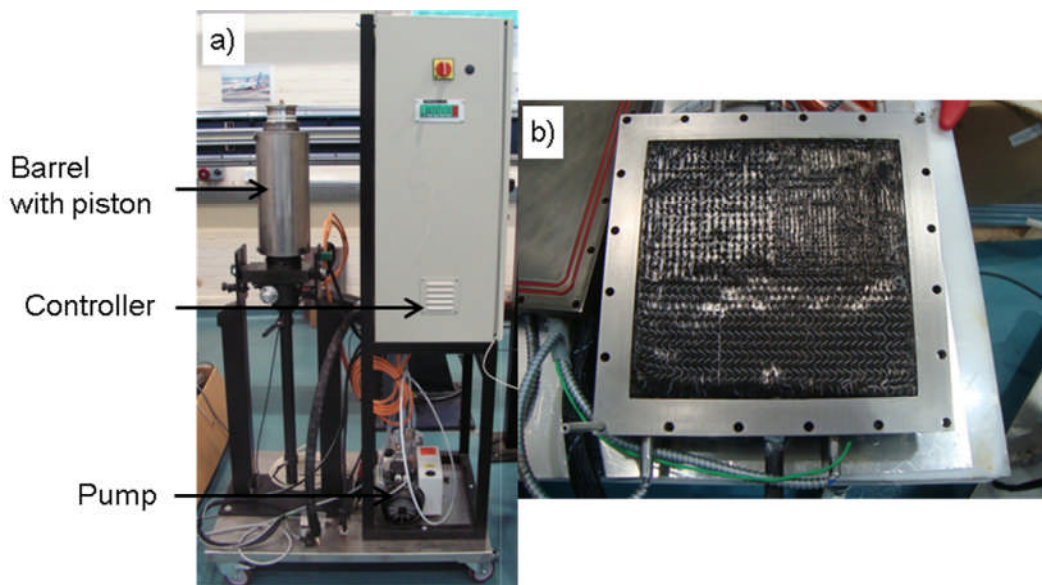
a) Isojet RTM piston and b) RTM mould with 6 mm thick metal frame.
